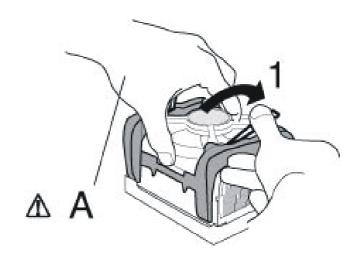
Installing the Fan Heatsink (5) Close Clip Lever (1), While Holding the Topside of Fan Heatsink (A)
